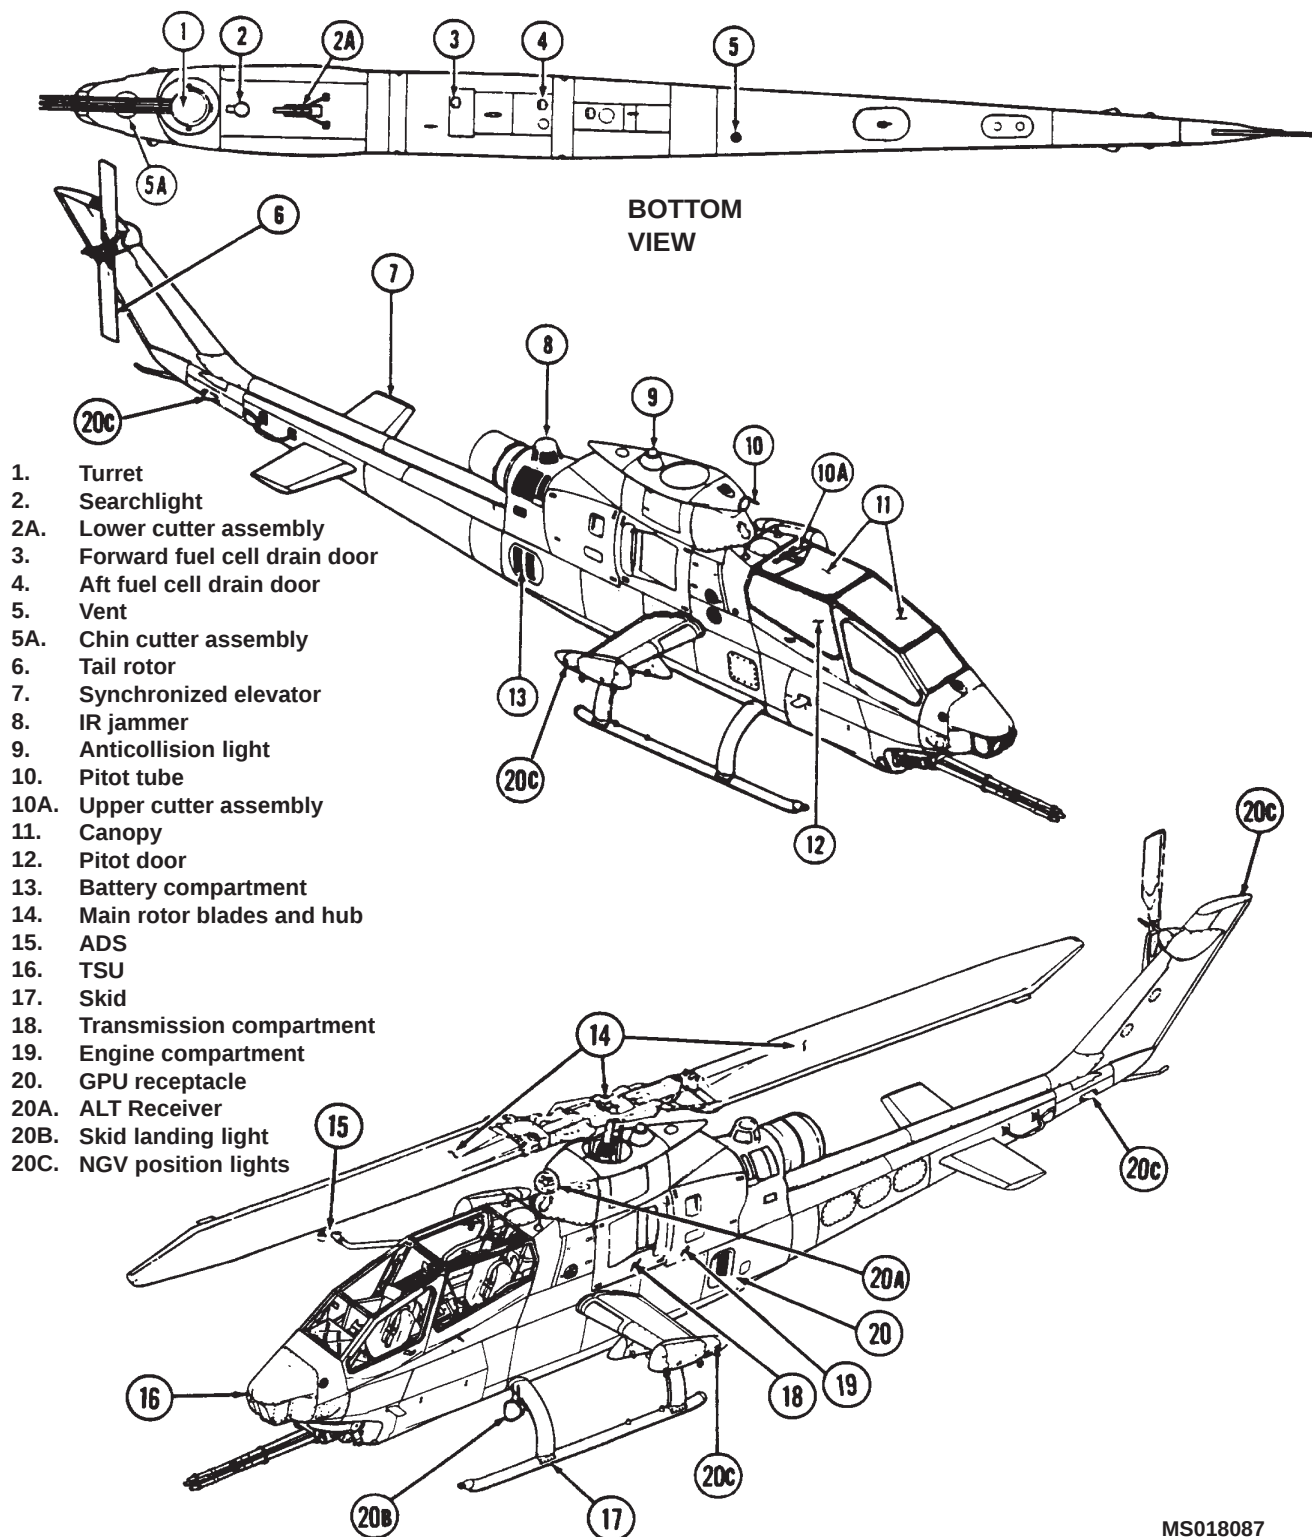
General Arrangement (Typical) (Sheet 1 of 2)
